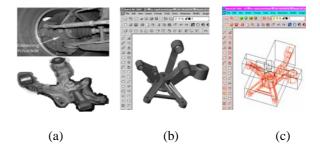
Steering Knuckle (a) up shown in car, bottom after dismantles (b) 3D solid CAD drawing, (c) Ware frame CAD Mold Design.
